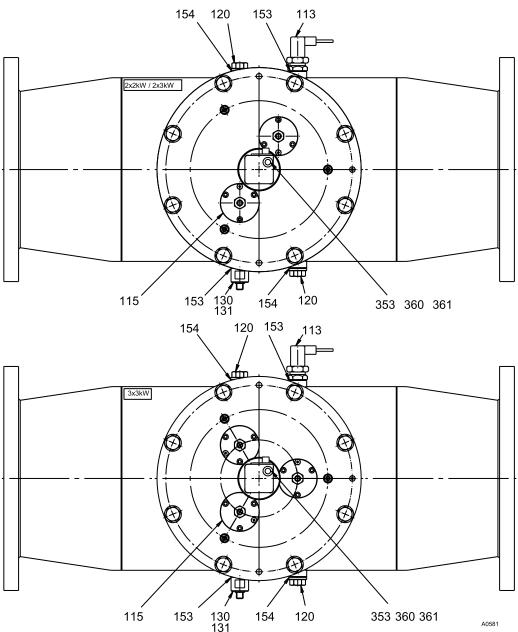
Spare parts drawing Dulcodes S multiple UV lamp system with automatic wiper
